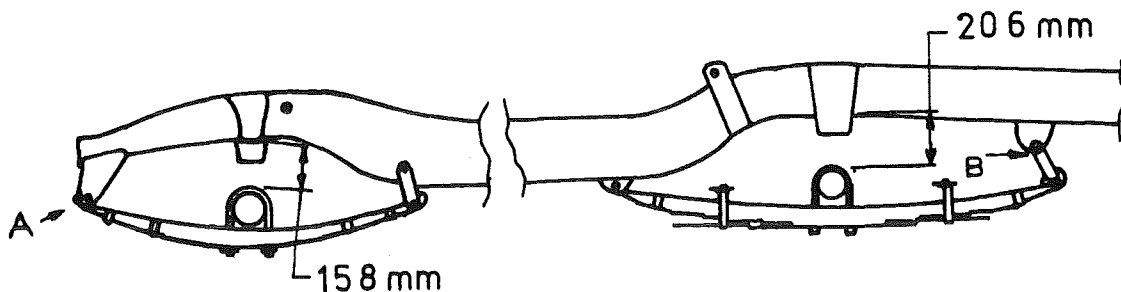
SPRING DIMENSION REFERENCE POINTS
